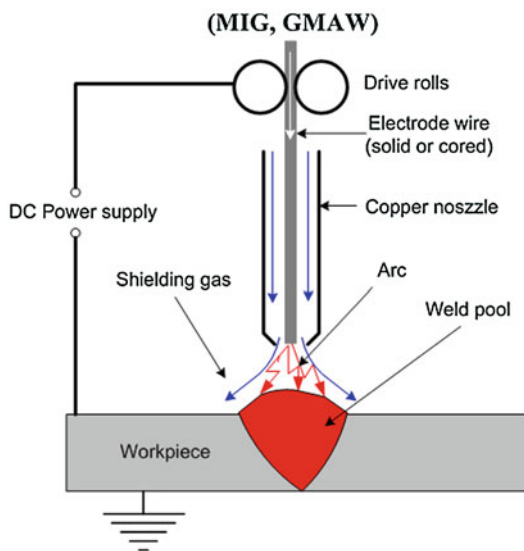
Gas metal arc welding (MIG/MAG, GMAW)
